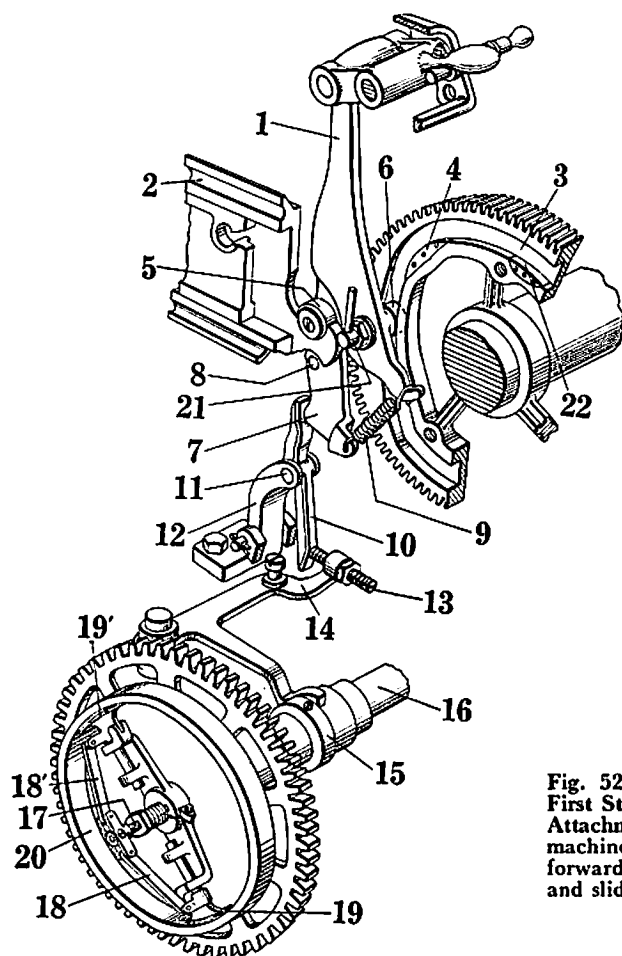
Perspective View of the First Style Mold Disk Slide Safety Attachment. This device stops the machine automatically when the forward movement of the mold disk and slide is obstructed.
